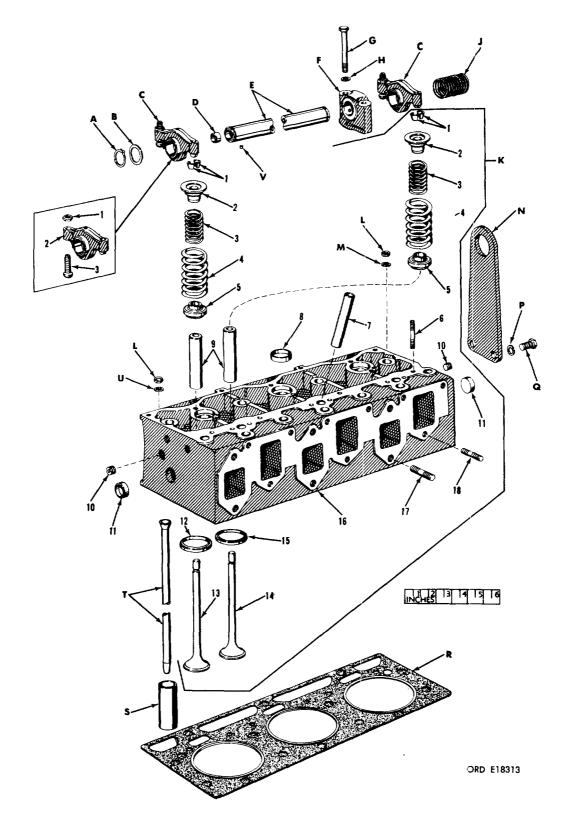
CYLINDER HEAD ASSEMBLY AND RELATED PARTS - EXPLODED VIEW.
